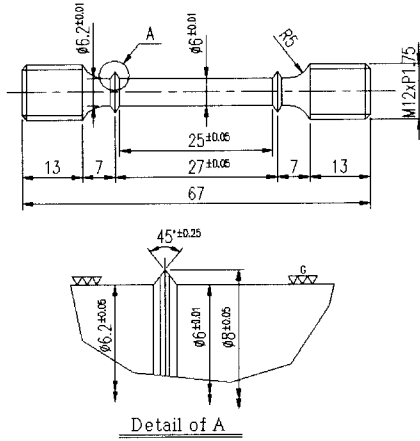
Shape and dimension of creep test specimen (ASTM E139-83) (unit : mm)
